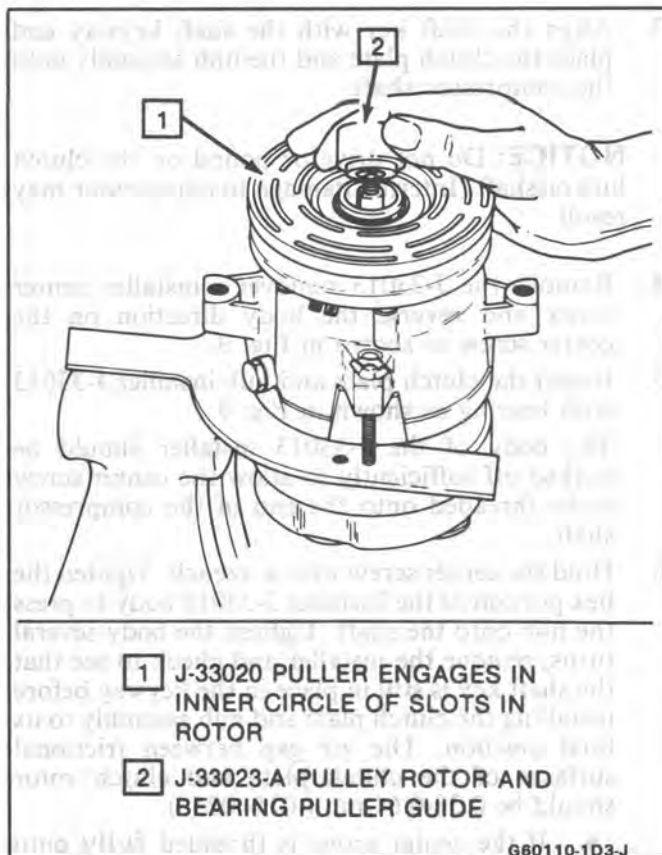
Installing Pulley Rotor/Bearing Puller Guide
